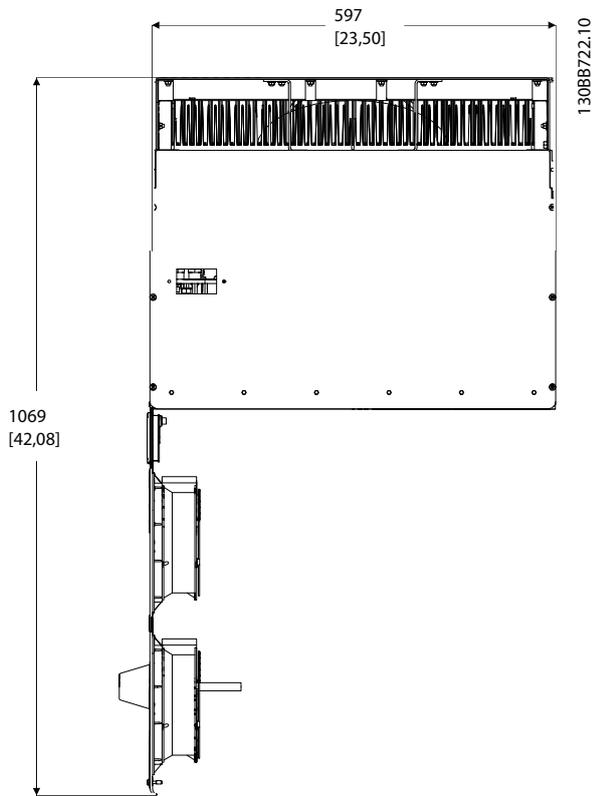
Space in front of IP21/IP54 enclosure type, frame size E9.
